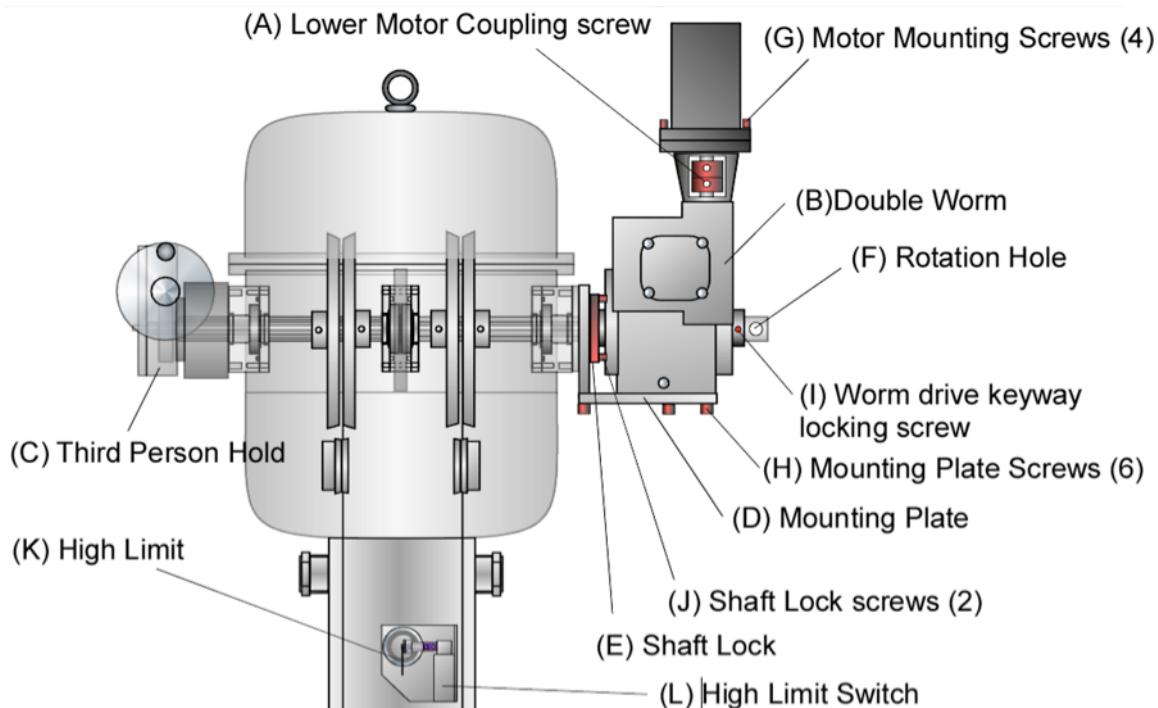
Details of the connections of the motor drive and connections to the shaft and spools located in the upper assembly.
